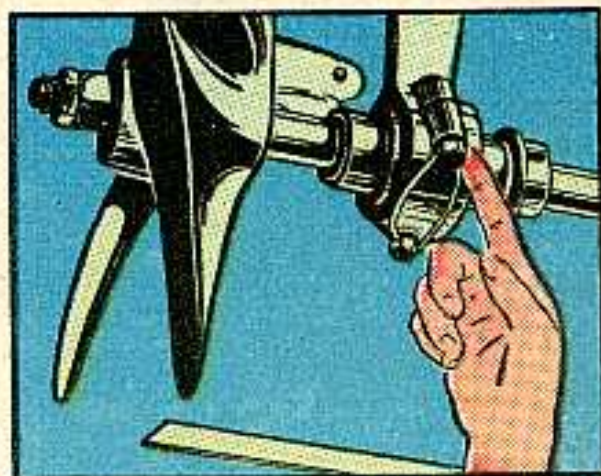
Wired heads or not most people with experience about these things have welded chains here to save losing the bearing cap.
